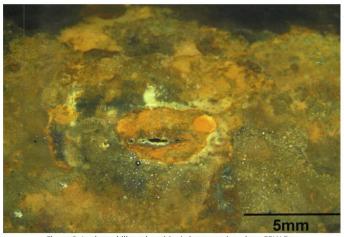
Leak on chiller tube with pitting corrosion along ERW line.
